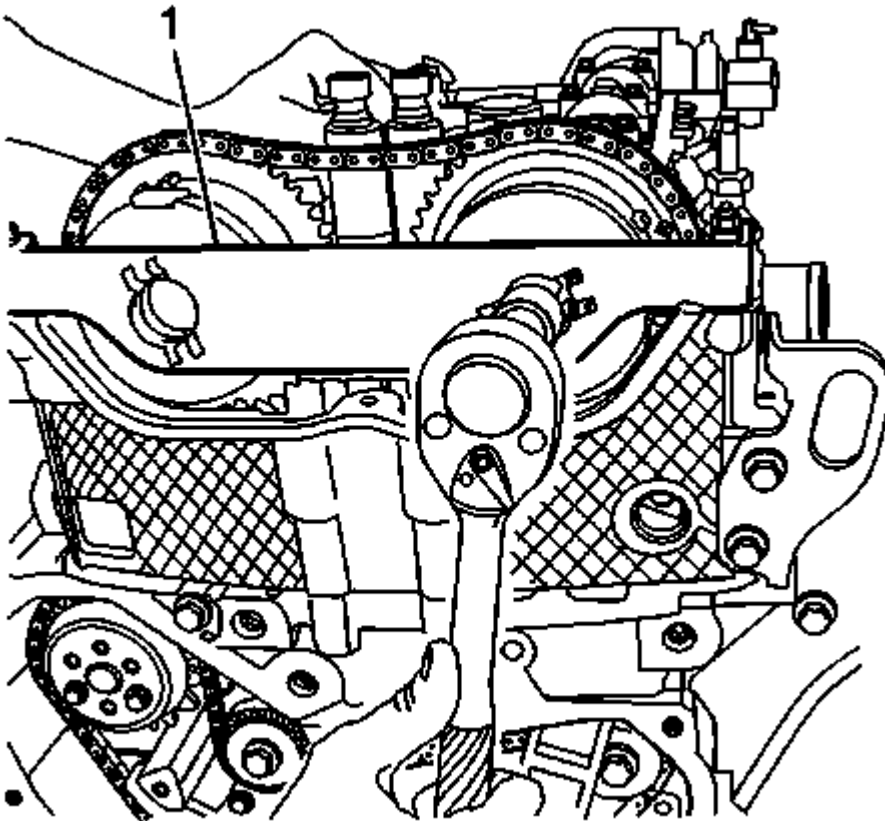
Loosening/Tightening Camshaft Actuator Retainer Bolts
